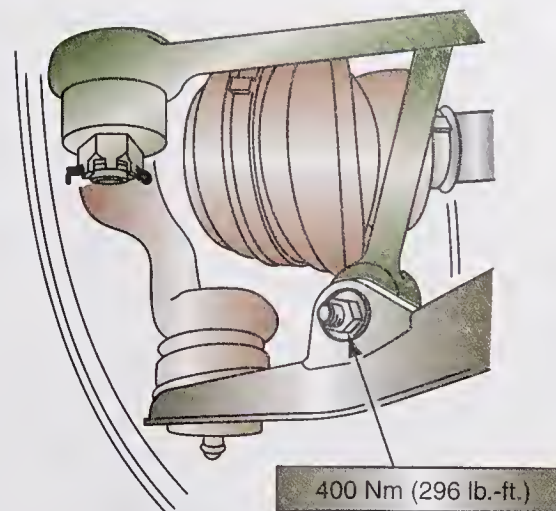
Removing the lower shock absorber retaining bolt and nut.
